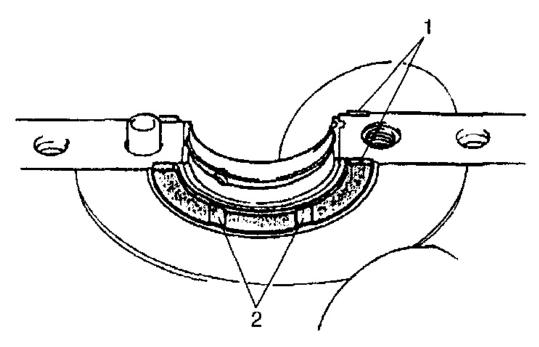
Fitting Main Bearings & O-Ring To Cylinder Block Courtesy of SUZUKI OF AMERICA CORP.
